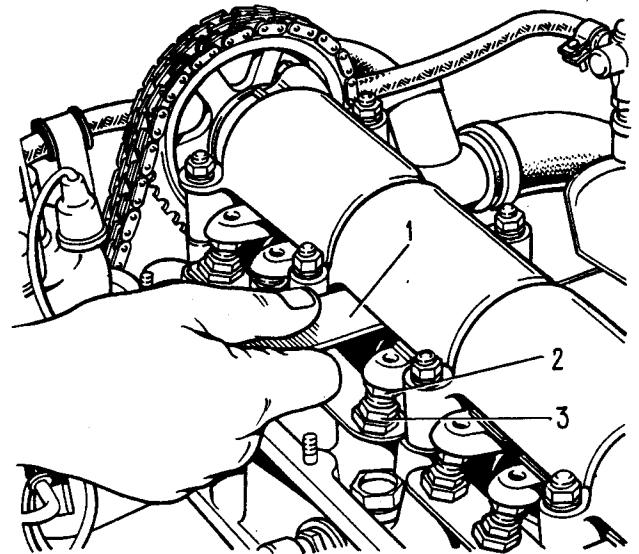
Checking Rocker-to-Cam Clearance: 1 - feeler gauge A.95111; 2 - adjusting bolt; 3 - adjusting bolt locknut
